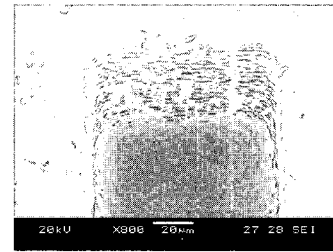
Micro cavity without bottom surface distortion. (92.0 × 93.7 μm² cavity, 100 μm machining depth, and 479.1 sec machining time)
